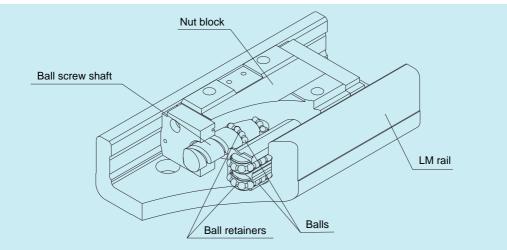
Construction of SKR-type LM Guide Actuator with Caged Ball Technology
